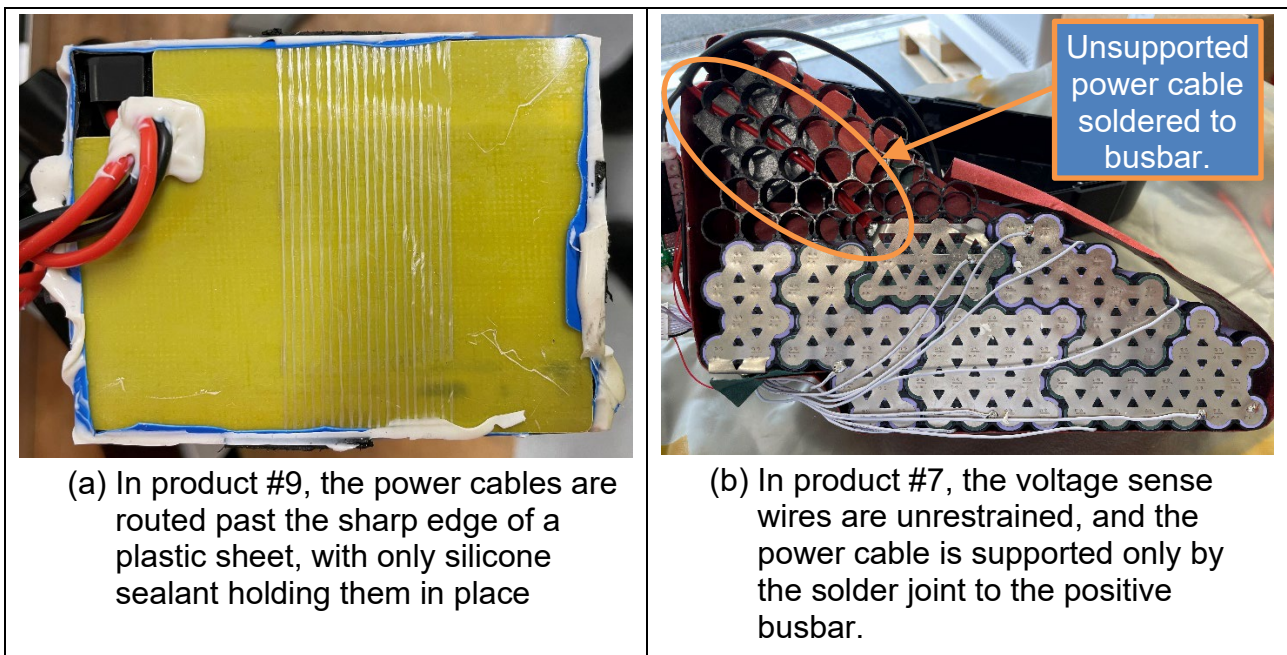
Examples of Poor Cable Routing in Conversion Kit Batteries
